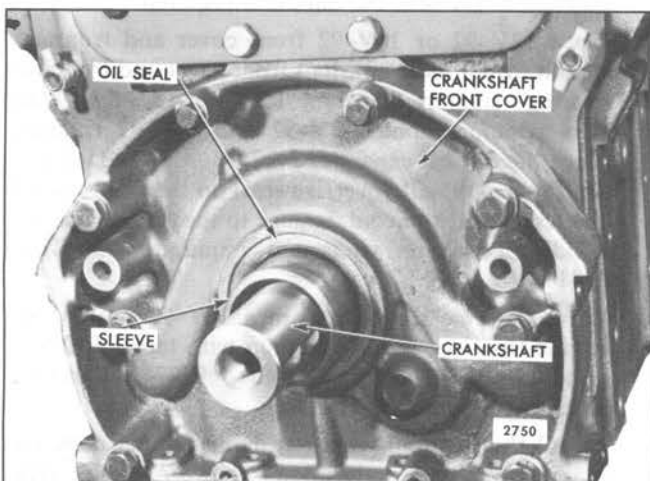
Typical Crankshaft Front Oil Seal Mounting
